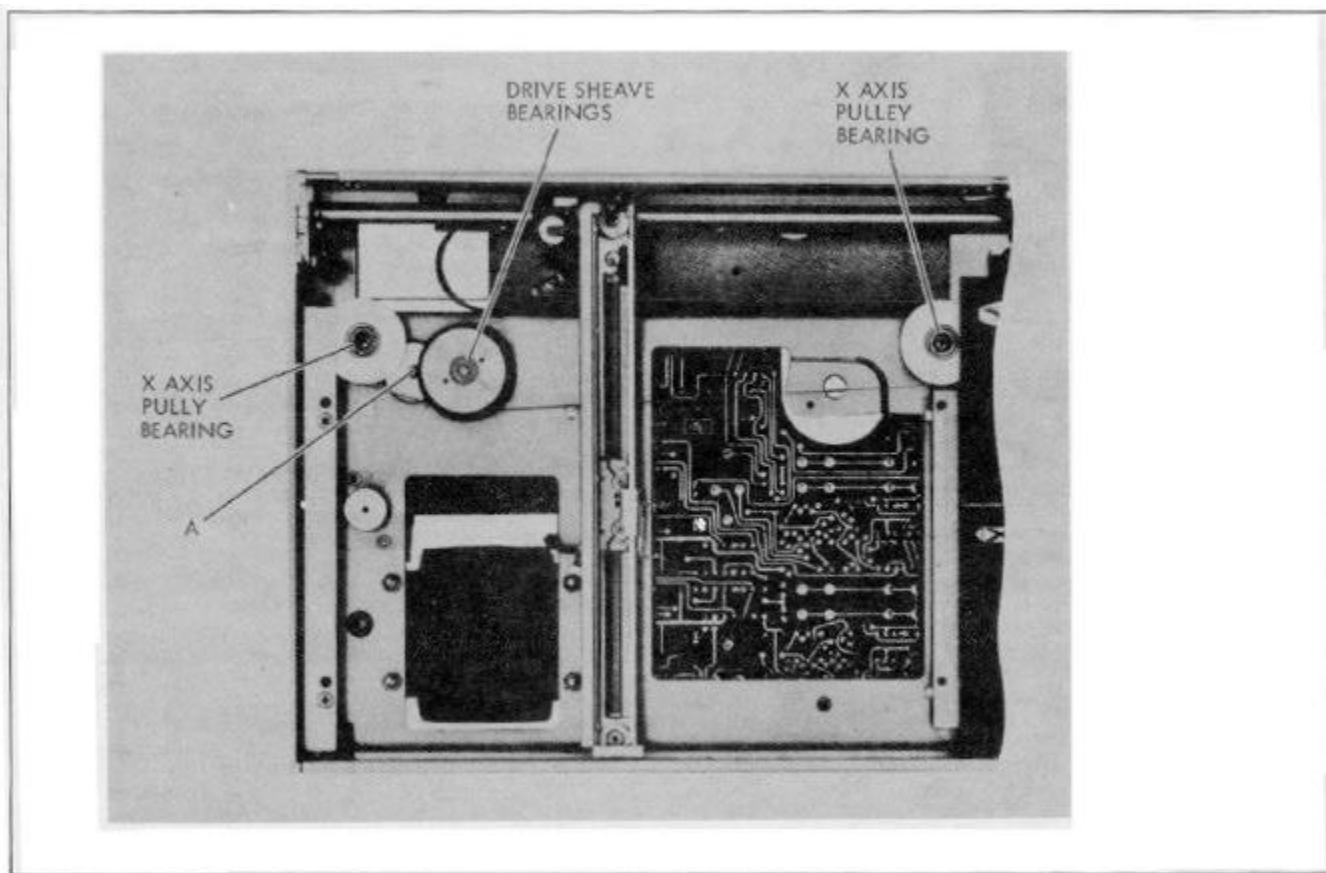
X-AXIS GEAR TRAIN BEARINGS
